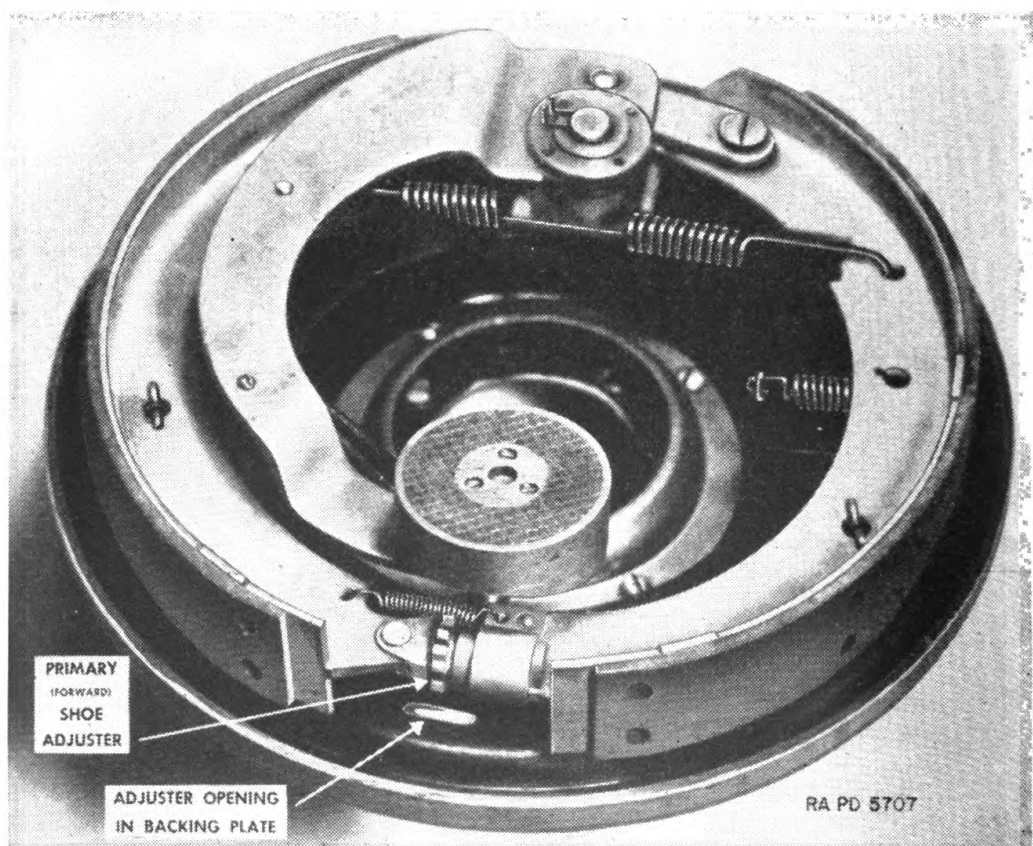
Adjuster opening in back plate, lever type electric brake.
